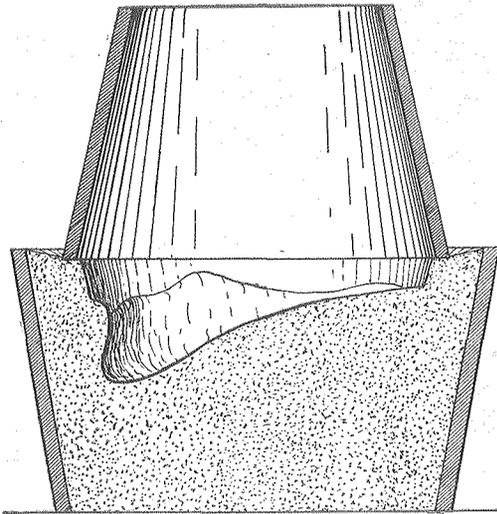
Sectional View of Small Ring Adjusted to Sand Matrix
